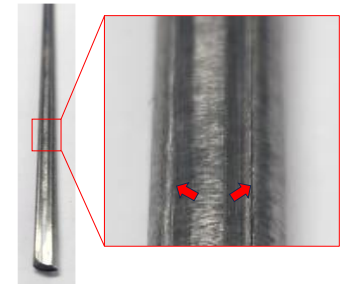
Overlap defects occurring in the circular-semicircular shape drawing process
